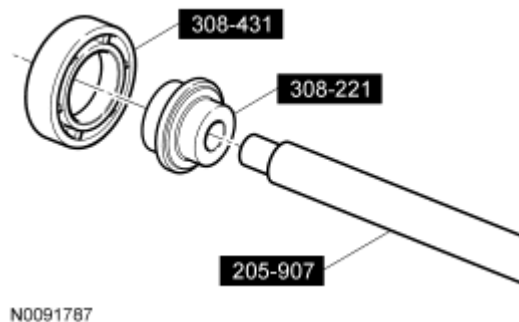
Assembling Driver Handle, Halfshaft Oil Seal Installer & Shaft Bearing Cup Installer
